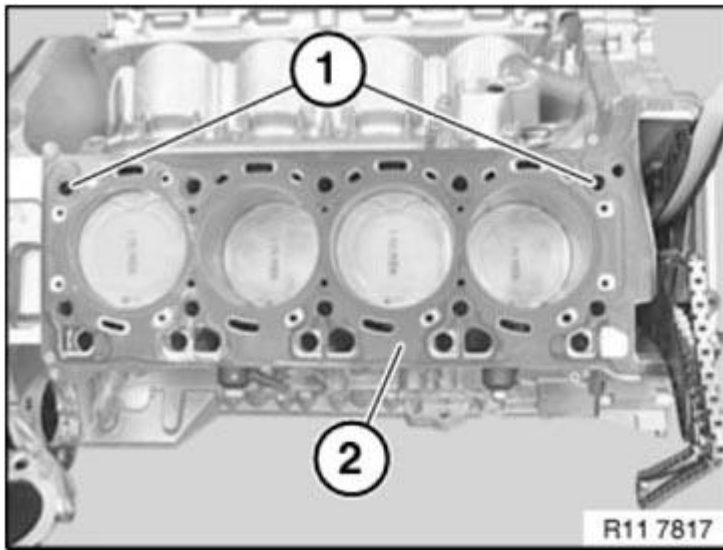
Identifying Fitting Sleeves And Cylinder Head Gasket
